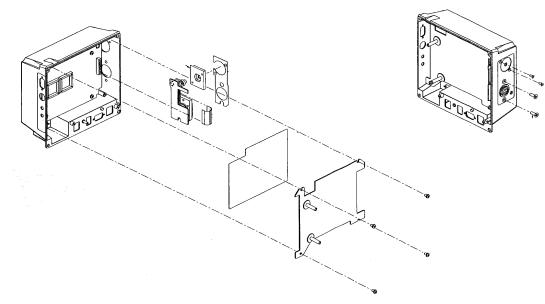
PCBA support plate and EMI interface PCBA for option H
